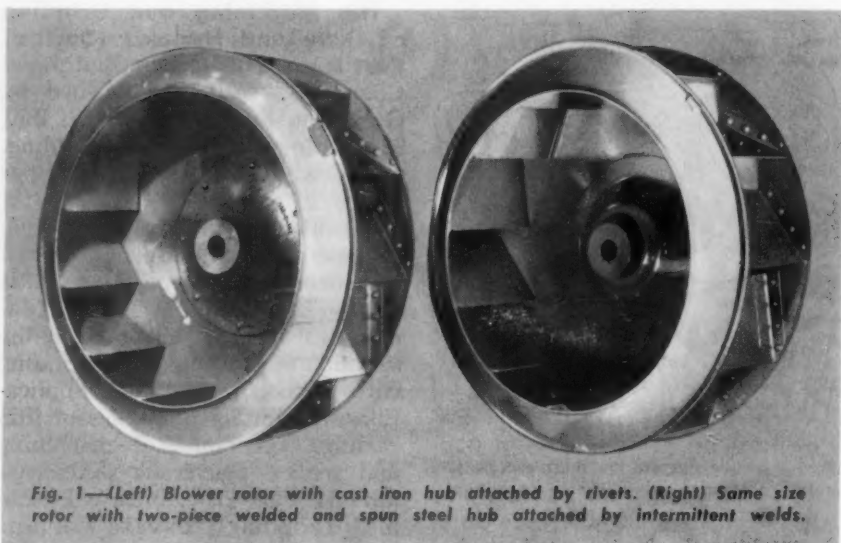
(Left) Blower rotor with cast iron hub attached by rivets. (Right) Same size rotor with two-piece welded and spun steel hub attached by intermittent welds.
